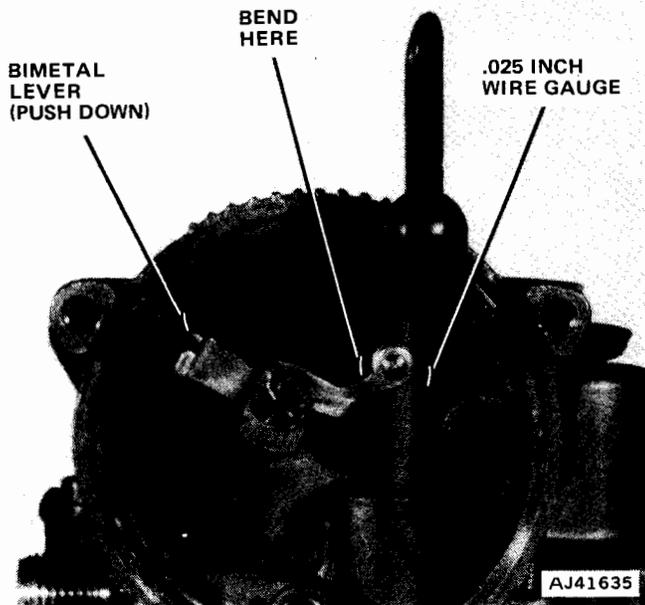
Initial Choke Valve Clearance Adjustment
